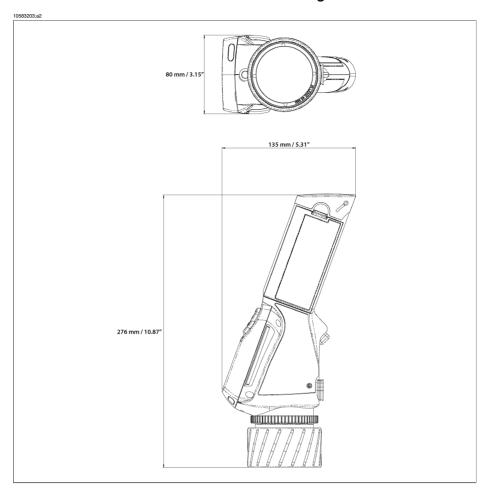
Overall dimensions of the camera with a 46.2 mm IR lens.
